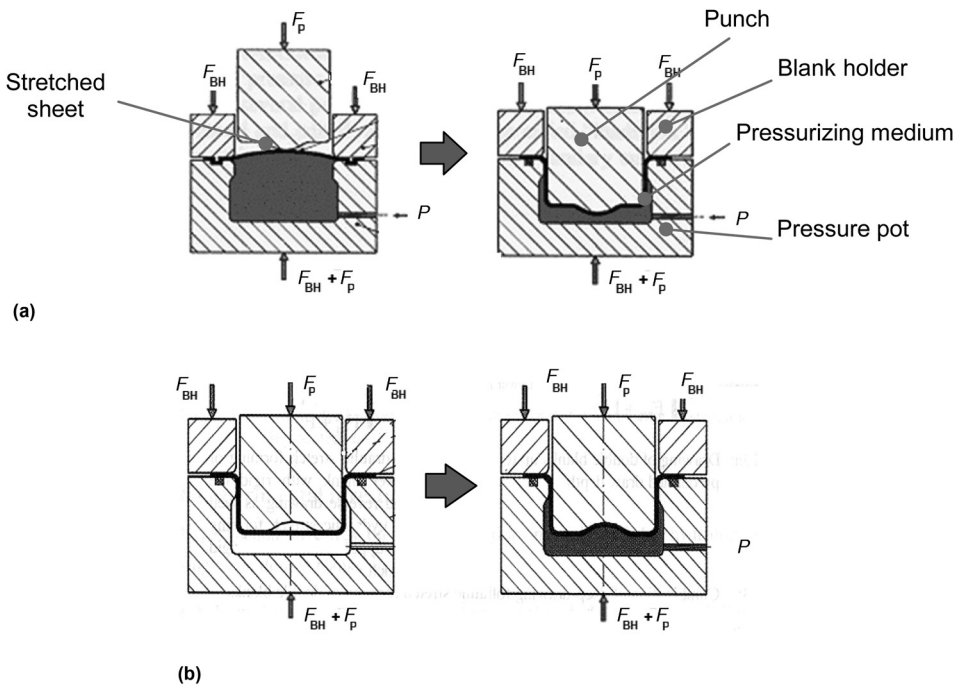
Combination of sheet hydroforming with punch (SHF-P) with stretching and deep drawing to produce complex parts in forming operation. (a) Prestretching followed by SHF-P. (b) Deep drawing followed by SHF-P. Source: Ref 8.11
